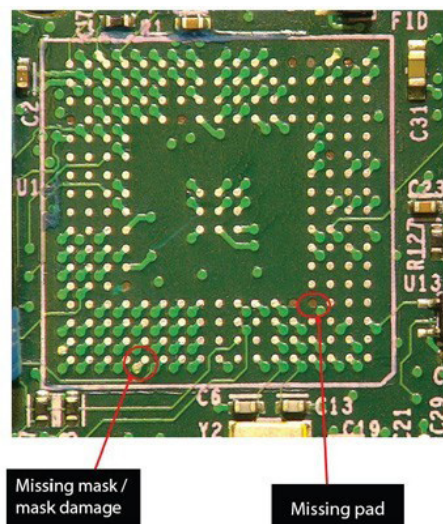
Example of BGA location with pad lifting and solder mask damage.
